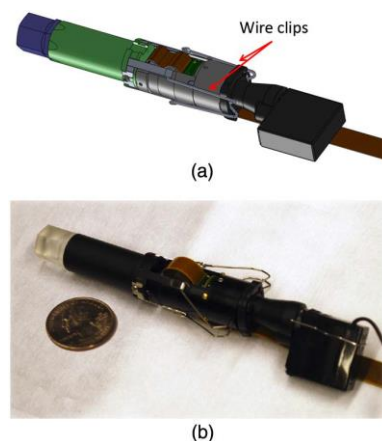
(Color online) (a) Solid drawing of micro camera assembly. (b) Photo of actual micro camera with a US quarter coin for size comparison.
